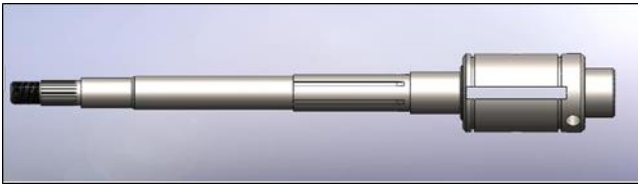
CVT driven shaft – Secondary pulley shaft.
